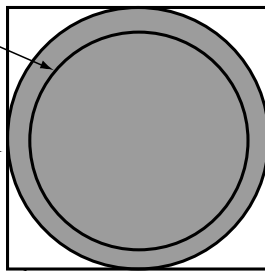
Footprint - 5 mils stencil -non solder mask defined
